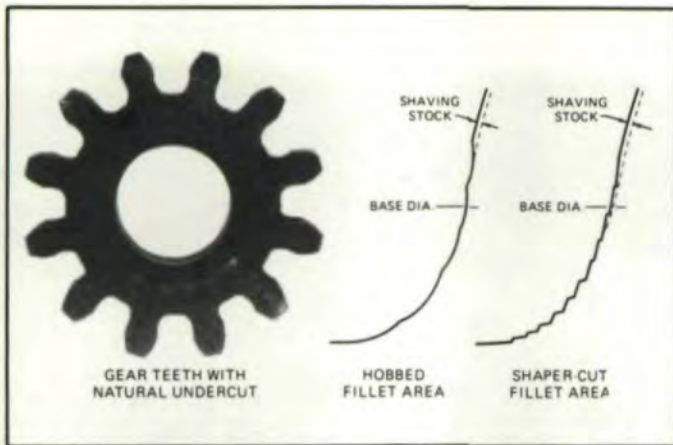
A 12-tooth pinion, left, showing natural shaper-cutter undercut. Enlarged fillets, right, show type of finish generated by hobbing and shaping.
